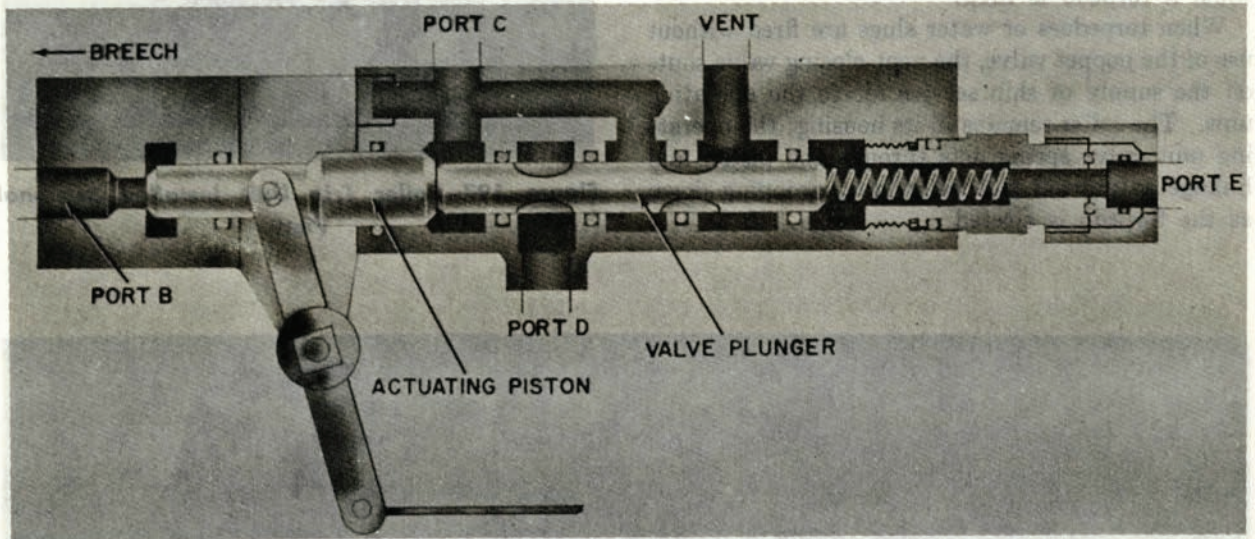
Poppet Valve Operating Unit—Poppet Valve Shut—Sectional View
